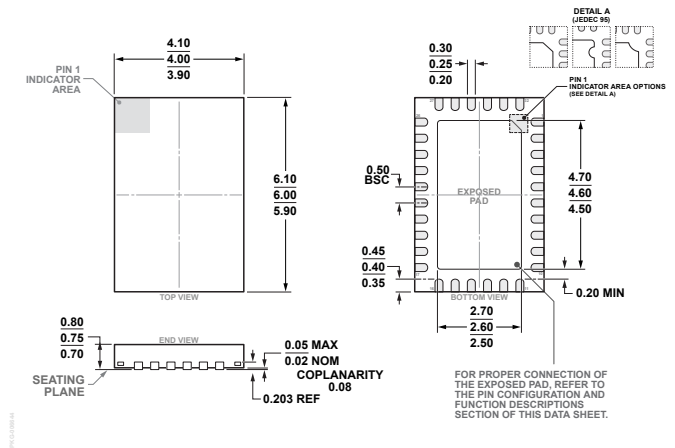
32-Lead Lead Frame Chip-Scale Package [LFCSP] 4mm × 6mm Body and 0.75mm Package Height (CP-32-34)
